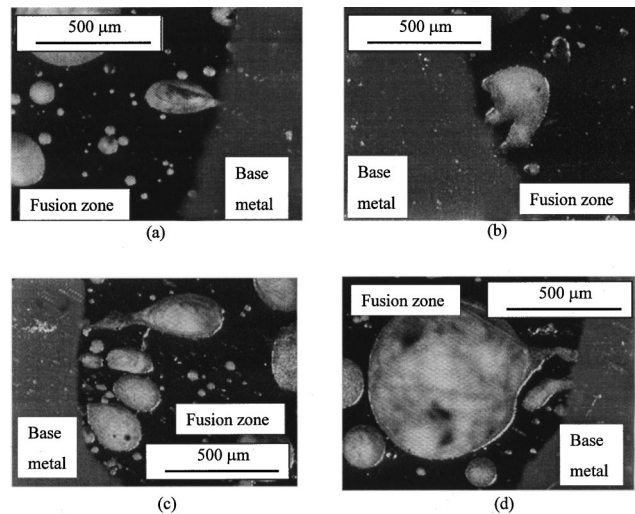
Cross sections of welds depicting the mechanisms of pore formation near the fusion line of the weld pool.
